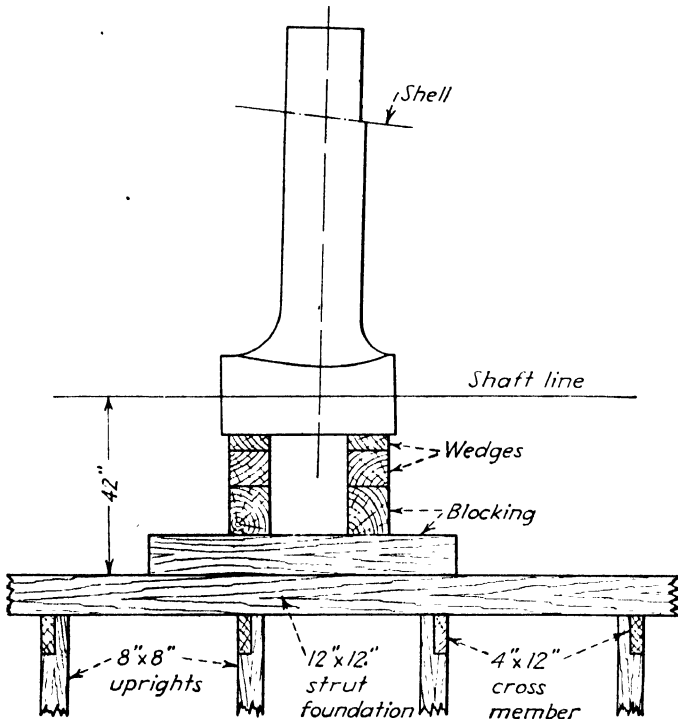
Foundation for supporting shaft strut temporarily in position.
